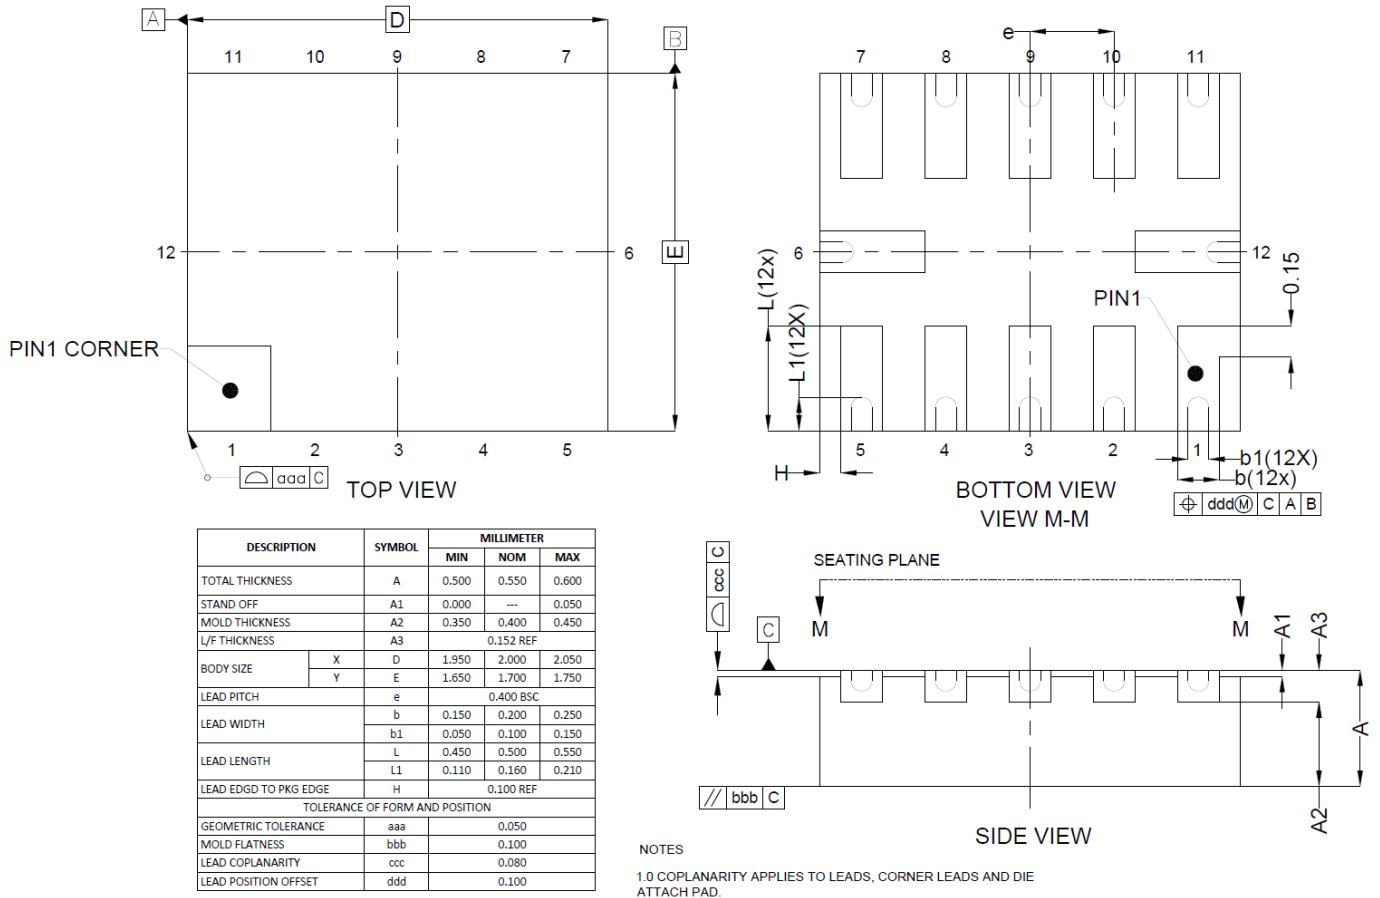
UQFN12 package shape and dimension in millimeters for NCAB0104-Q1QBDR
